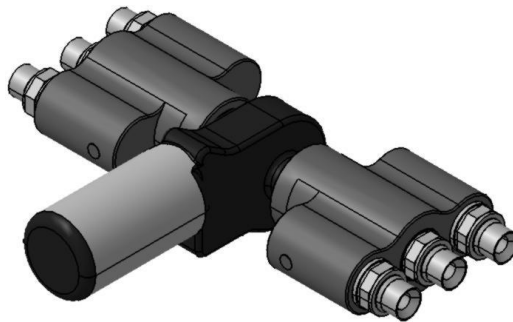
Two SHDVs and a rotating actuator (DC-motor with gearbox).
